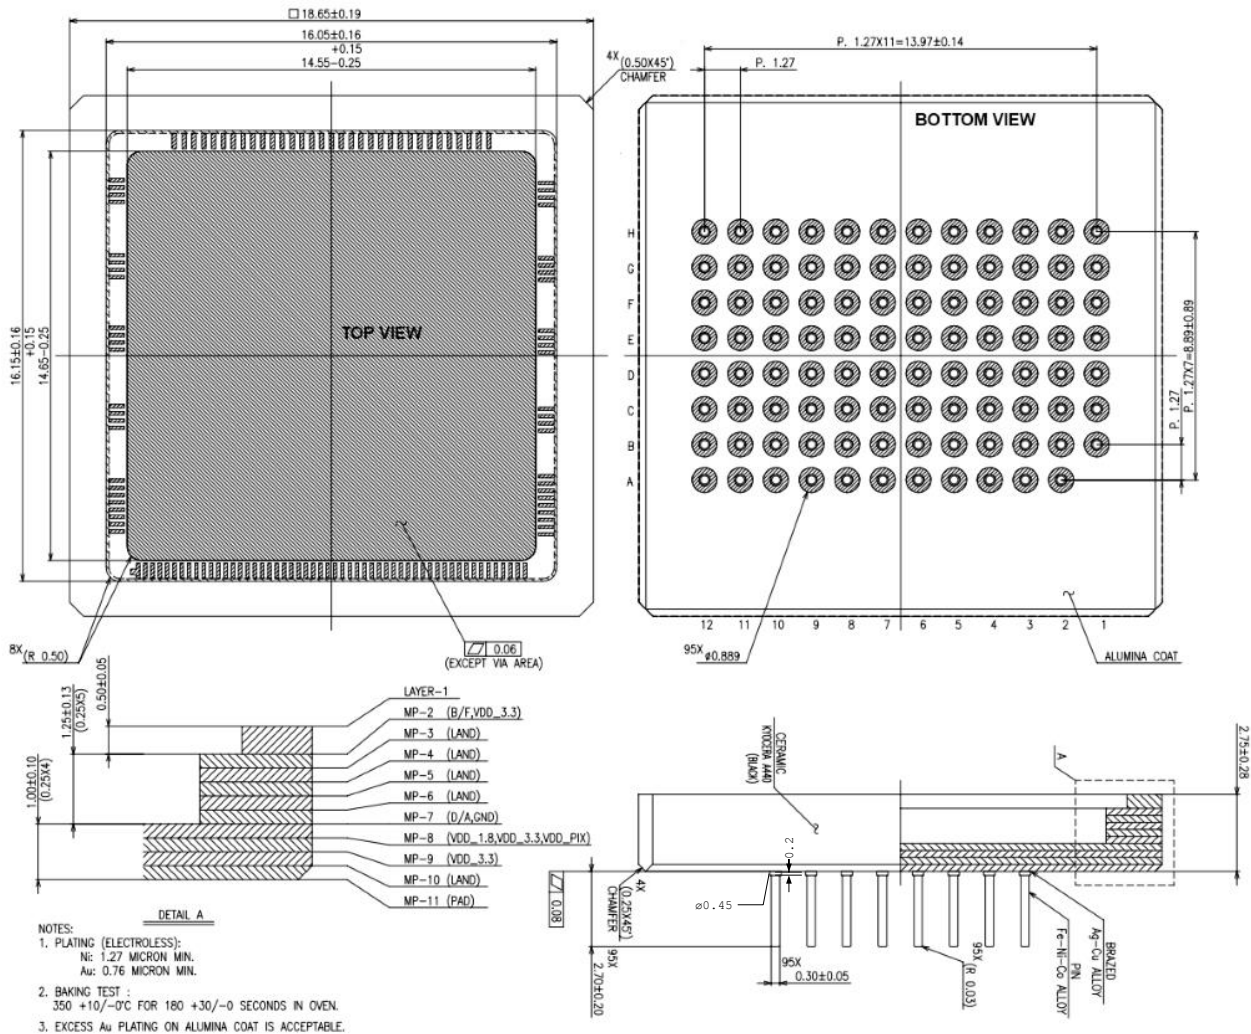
PGA package drawing of the CMV4000. All dimensions are in mm.
